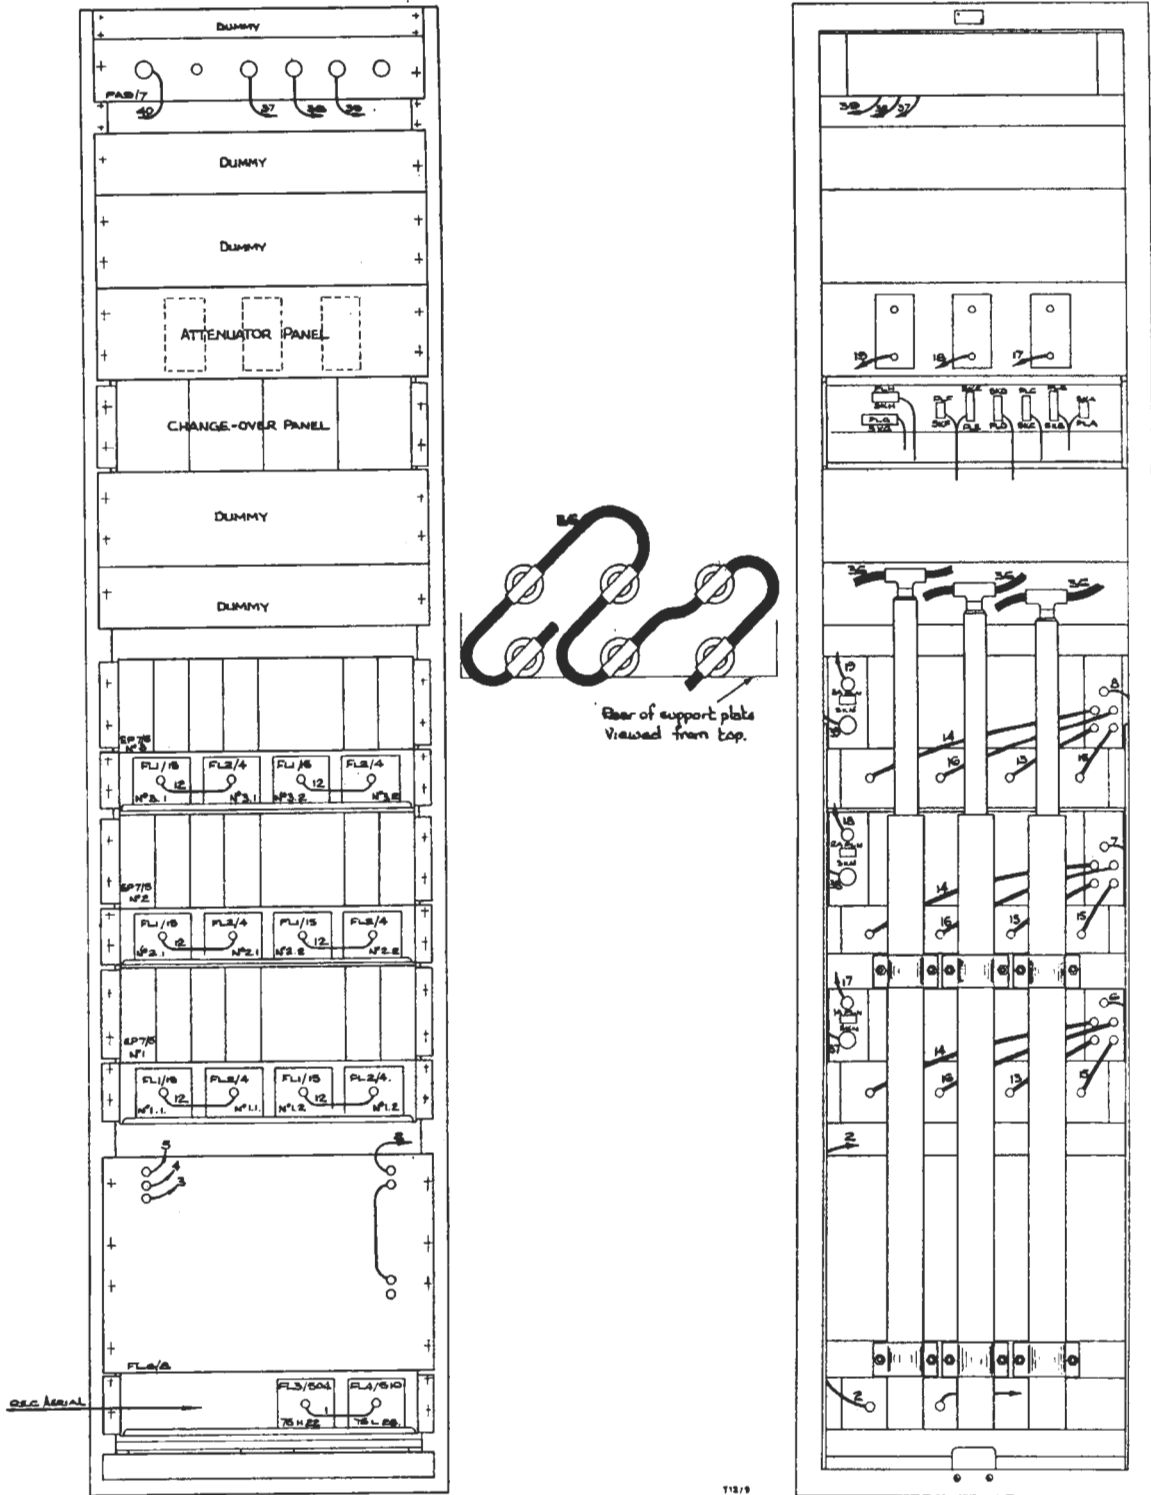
BA13/11 Assembly: Front (left) and Rear Views
